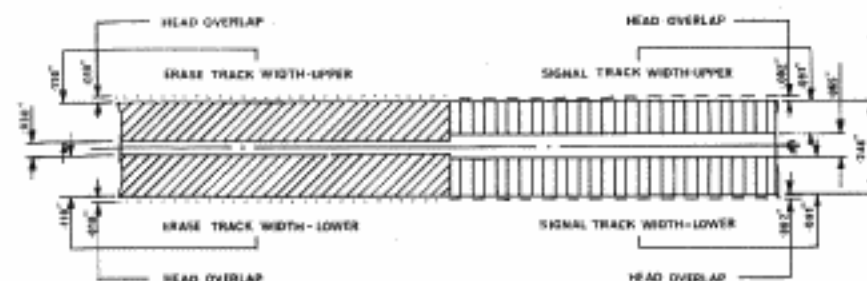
STEREO TRACK DIMENSIONS MODELS 702 AND 722
